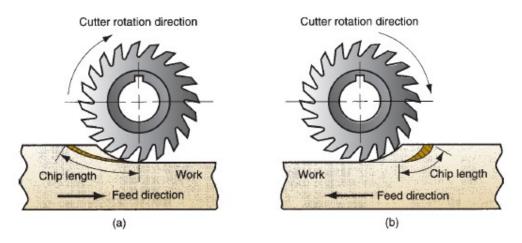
Two forms of peripheral milling operation with 20 tooth cutter: a) up milling, b) down milling
